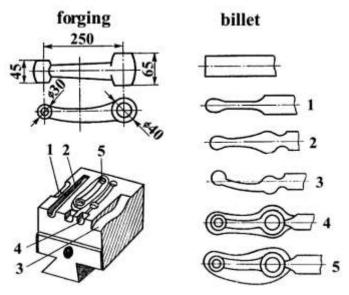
Multi-impression die and operations of forging: 1 – fullering; 2 – drawing (extending); 3 – bending; 4 – blocking; 5 – finish fording
